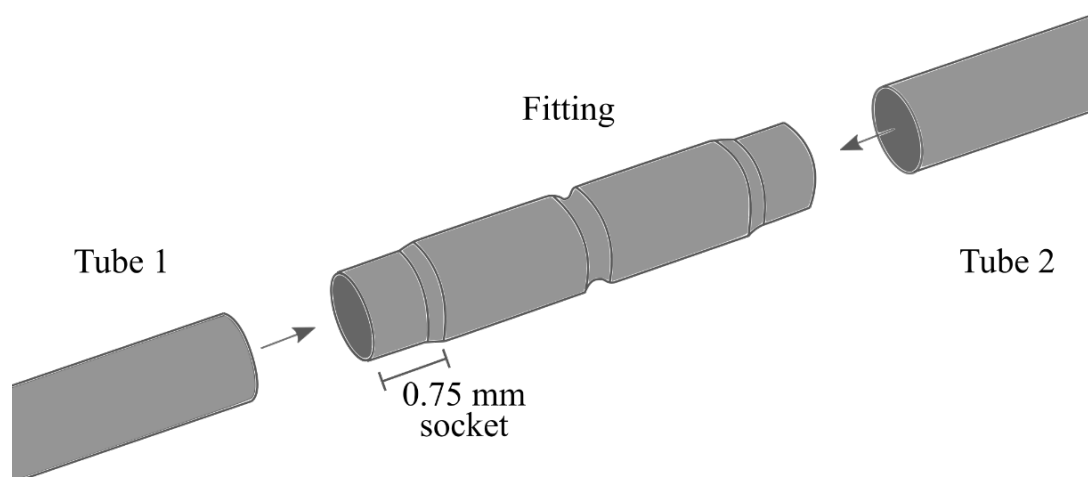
Illustration of the sleeve fitting and socket insertion mechanism for joining two tubes.
